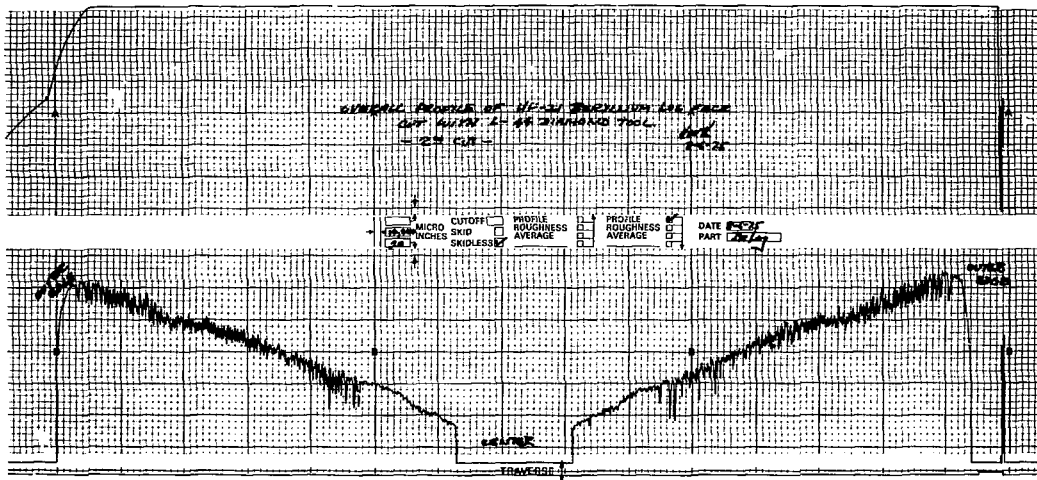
Trace of face cut with tool #L-44; second pass, no coolant.
